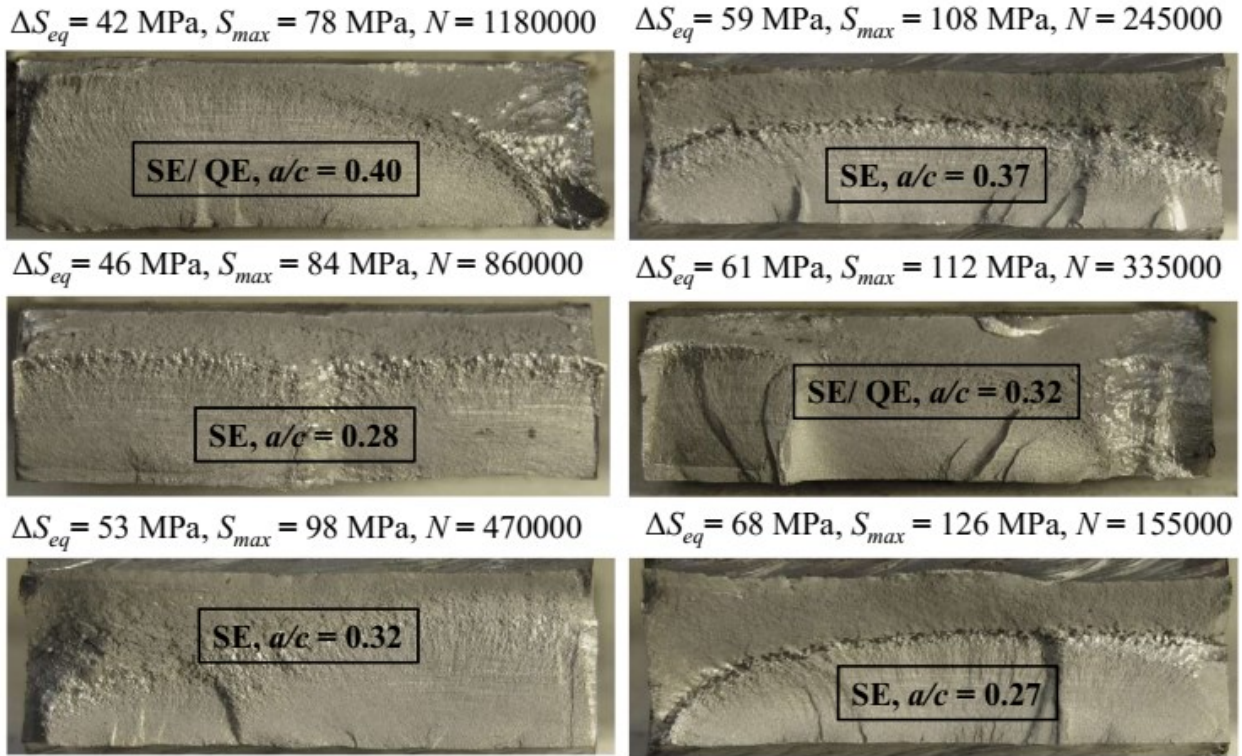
Fracture surfaces for as-welded aluminum specimens under CA-UL loading
